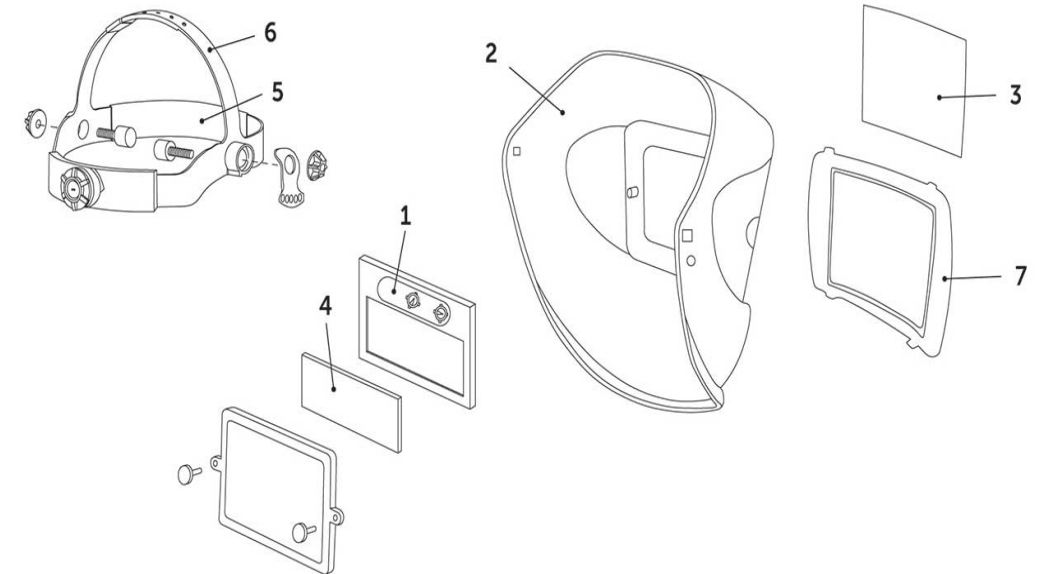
Element of the welding filter. Source: <http://www.jackson-safety.com/wh40-30-element.html>
